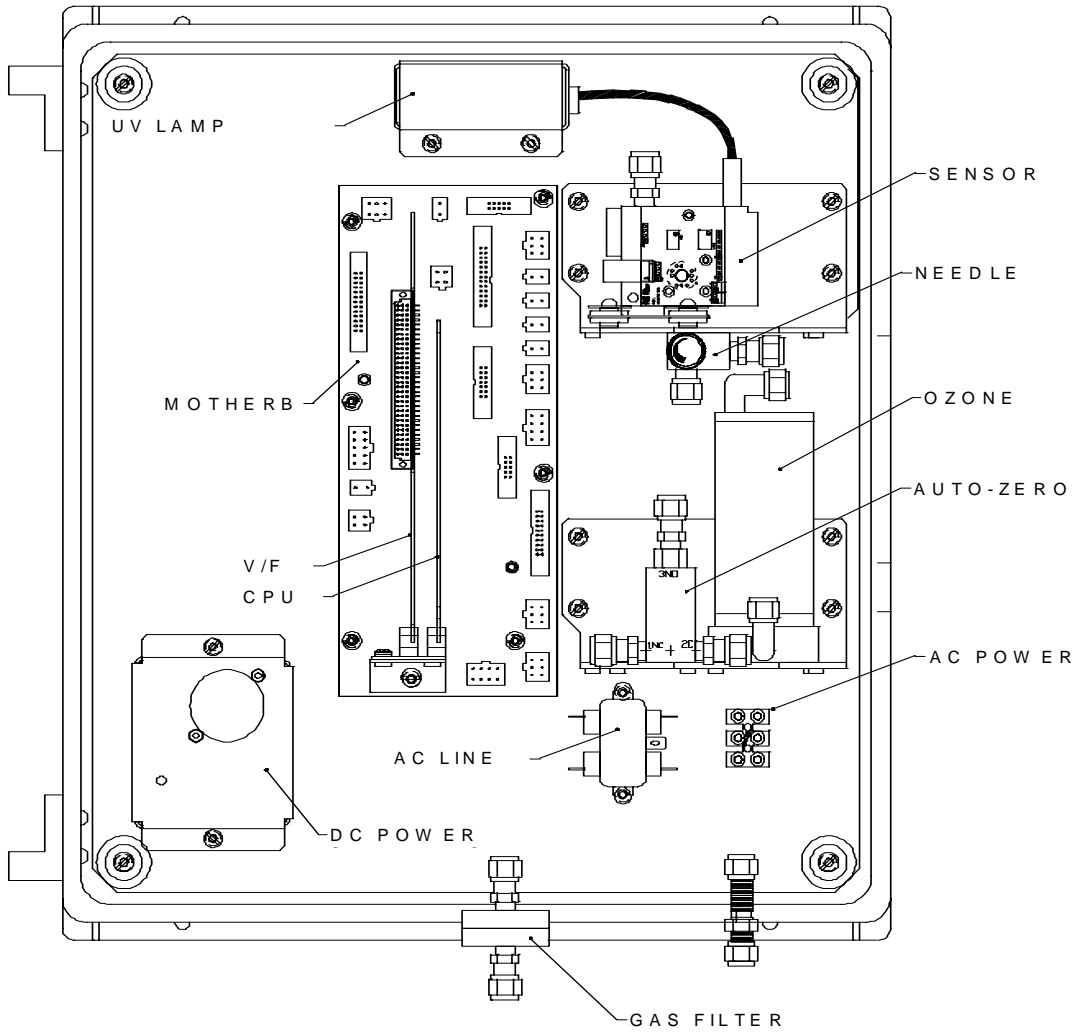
NEMA4X ASSEMBLY LAYOUT
